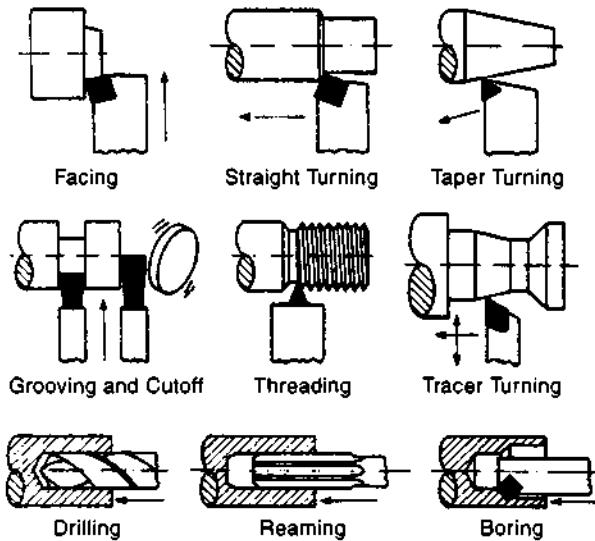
A1 Facing, turning, grooving, thread cutting, drilling, reaming, and boring performed on turning equipment. In facing, the tool moves perpendicularly to the axis of rotation of the spindle and a flat surface is produced. In straight turning, the tool moves parallel to the axis of rotation and a cylindrical surface is generated. In tapered turning, the tool moves at an angle to the axis of rotation and a tapered surface is produced. In tracer turning, the single point cutting tool moves inward and outward as it moves longitudinally, creating a contoured or other shaped surface on the rotating workpiece. The tool's path can be controlled by a template or by computer numerical control (CNC). In grooving, the tool, ground to the width of the groove desired, is plunged, or fed inwardly, creating a groove in the outer surface of the workpiece. Grooving can also take place internally when a cutter inserted in the center hole of a workpiece is fed outwardly. In threading, the cutting tool, shaped to the flank angle of screw threads, moves longitudinally in a fixed relationship with the rotation of the workpiece. (from Bralla, *Design for Manufacturability Handbook*, 1998, McGraw-Hill Companies. Reproduced with permission.)
